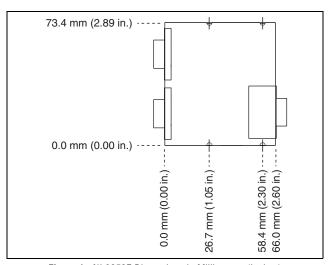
NI 9853E Dimensions in Millimeters (Inches)
